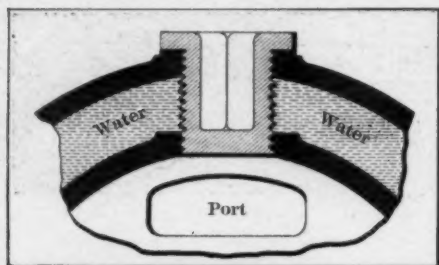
Section showing defective cylinder plug allowing water to enter combustion chamber.
